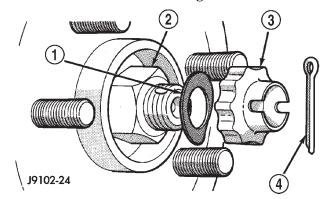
Cotter Pin, Nut Lock & Spring Washer Removal
